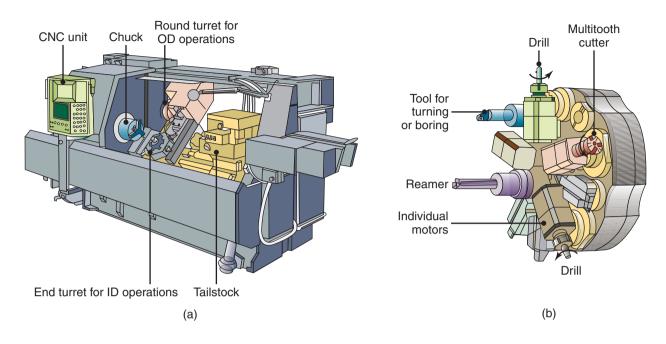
(a) A computer-numerical-control lathe with two turrets. (b) A typical turret equipped with 10 tools, some of which are powered.
